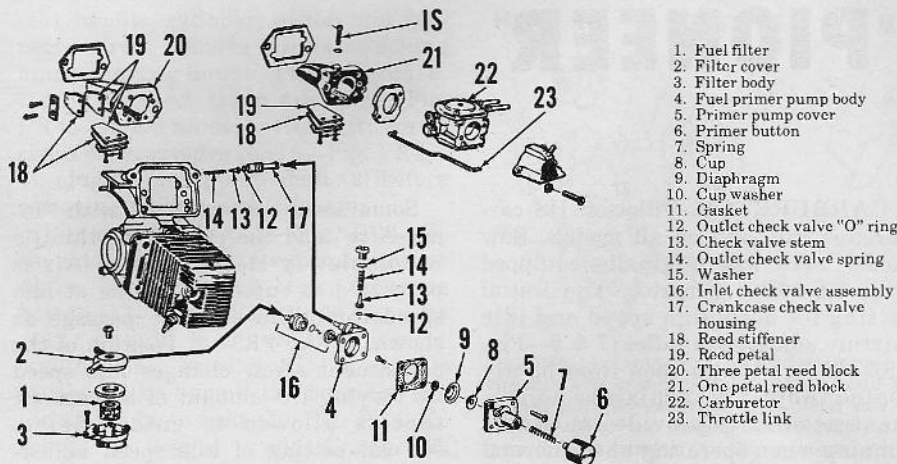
Partially exploded view showing the early (three petal) reed valve assembly on the left and the later (one petal) reed valve assembly on the right. Other fuel system components are also shown.
